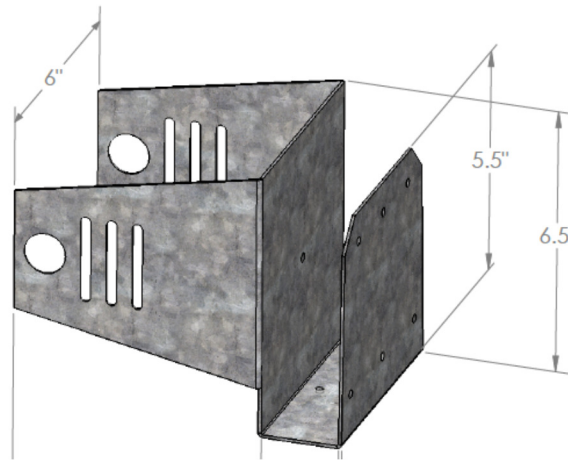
OneLedge connector dimensions. Dimensions are not shown here for (a) horizontal length of tabs and for (b) depth of seat (horizontal dimension to accommodate ledger board thickness) because these dimensions vary for different versions of the product. See Table 2 for ranges of applicability of testing. (Image from www.watkinshanger.com)
